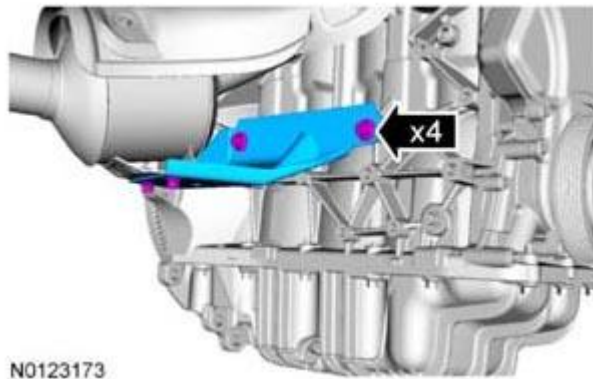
Locating Bolts And Lower Catalytic Converter Bracket
